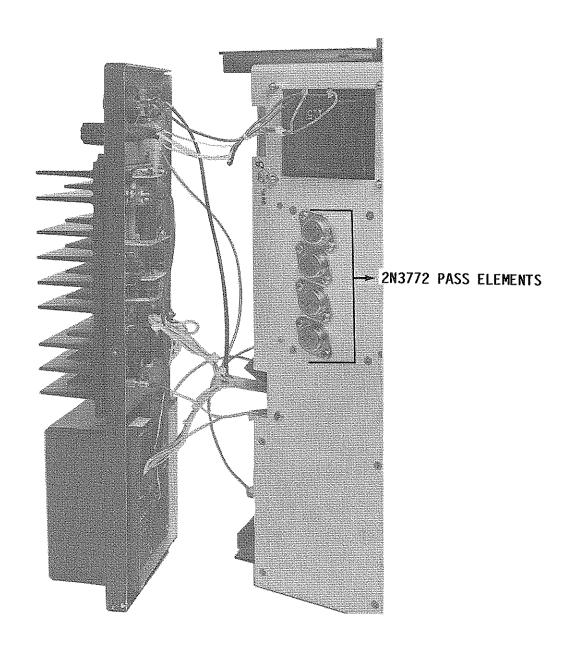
SHEET 7 of 19, 26V POWER SUPPLY DISASSEMBLY
